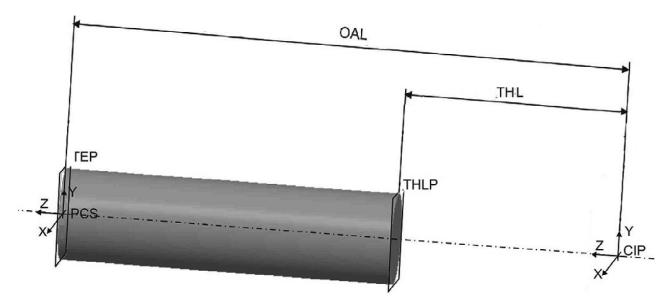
Thread-cutting tap with offset shank — Non-cutting part
